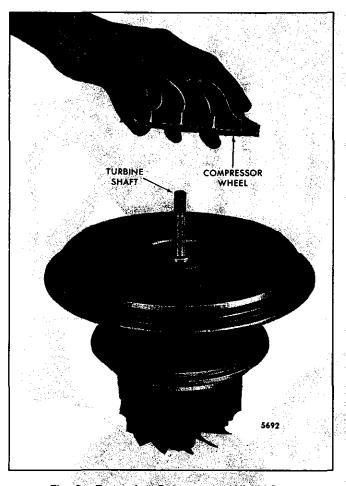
Removing Compressor Wheel from Turbine Shaft
